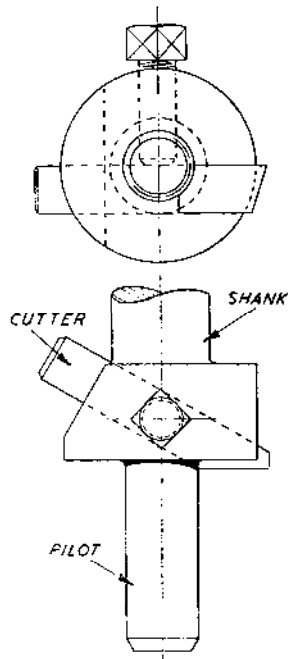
Combined drill and face cutter, suitable for shallow counterboring.
